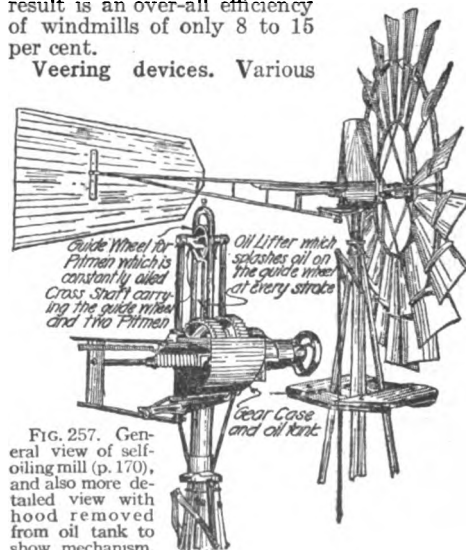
General view of self-oiling mill (p. 170), and also more detailed view with hood removed from oil tank to show mechanism. (Aermotor Co.)
